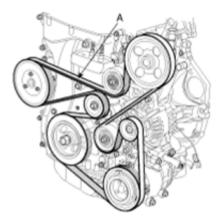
Installing Drive Belt Tensioner, Tensioner Pulley, & Idler Pulley Courtesy of KIA MOTORS AMERICA, INC.
